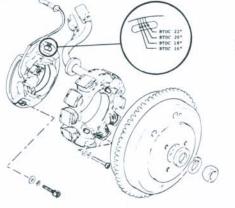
View of ignition stator timing marks on twin cylinder models with 150W lighting system. Flywheel and lighting stator will need to be removed to check or adjust stator timing.
